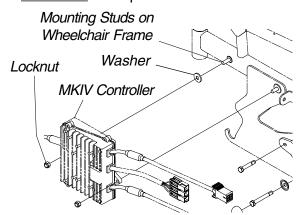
REMOVING/INSTALLING MKIV CONTROLLER
